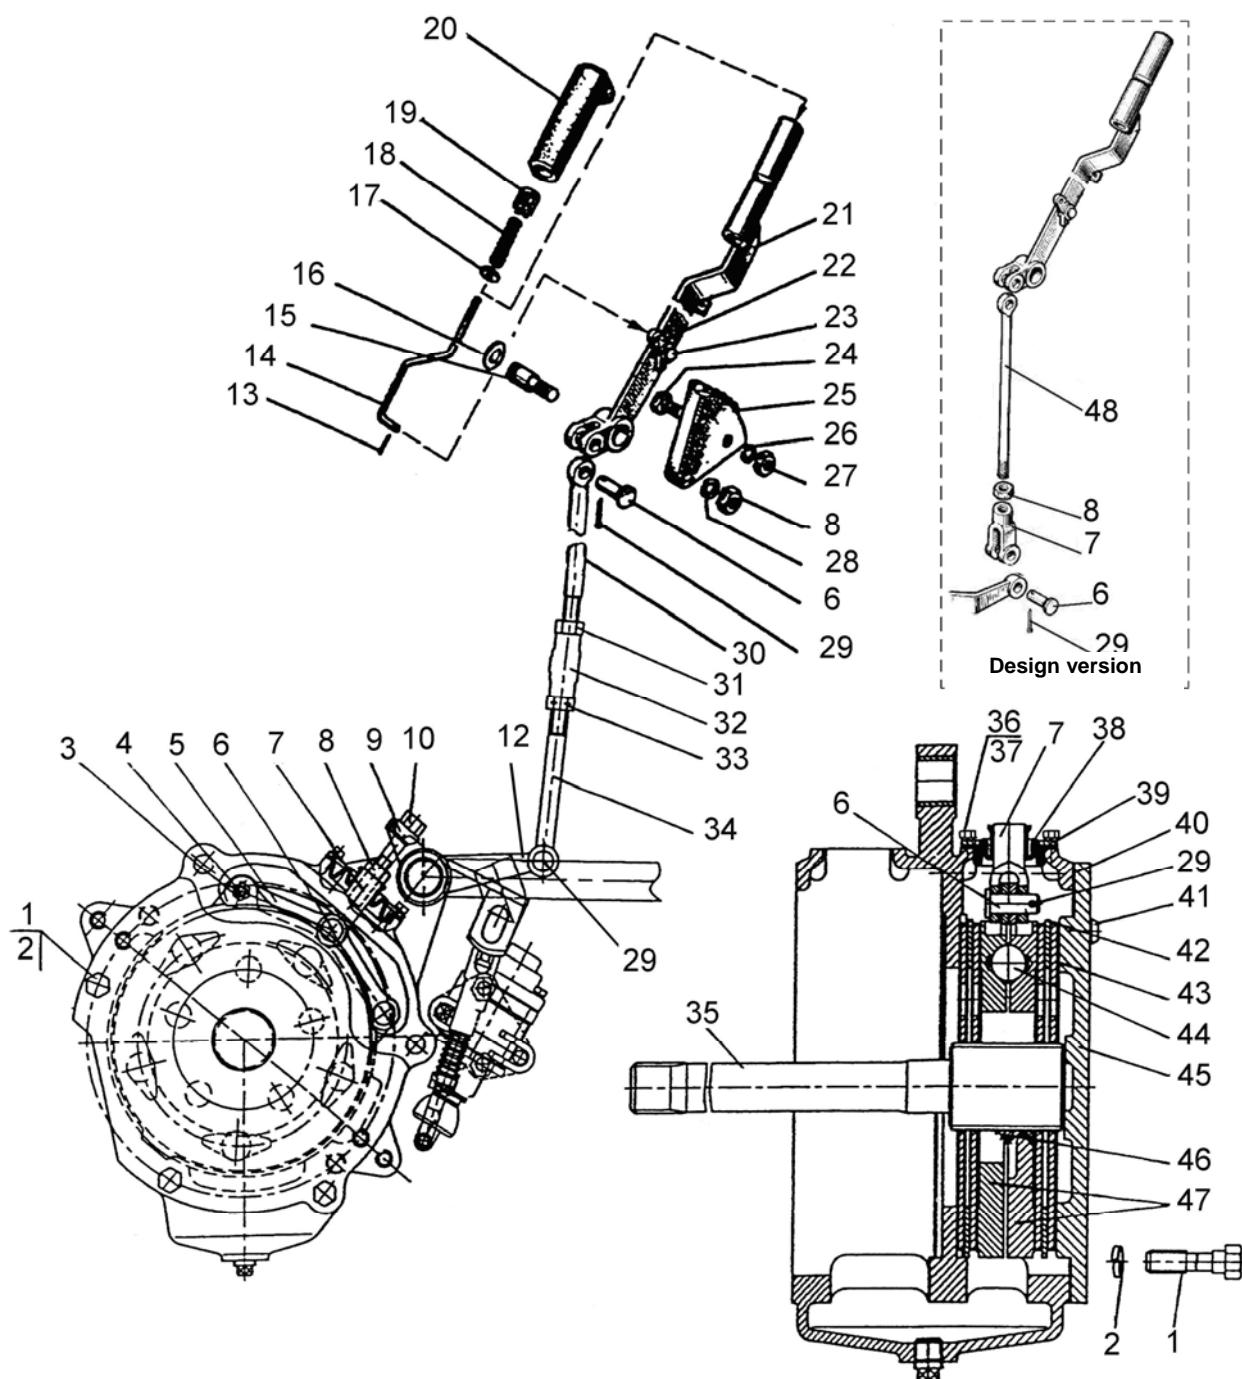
Parking brake. Parking brake control (for wet brakes)
